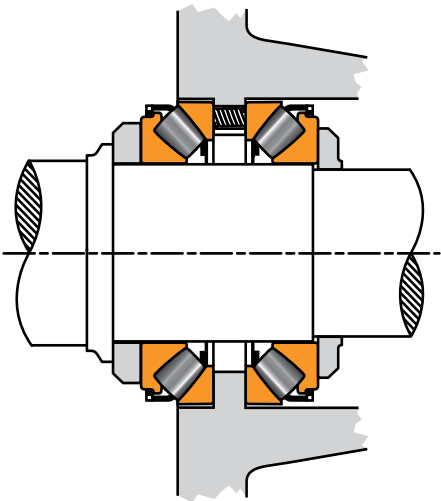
Back-to-back mounting arrangement of a TSR-EJ bearing set.
